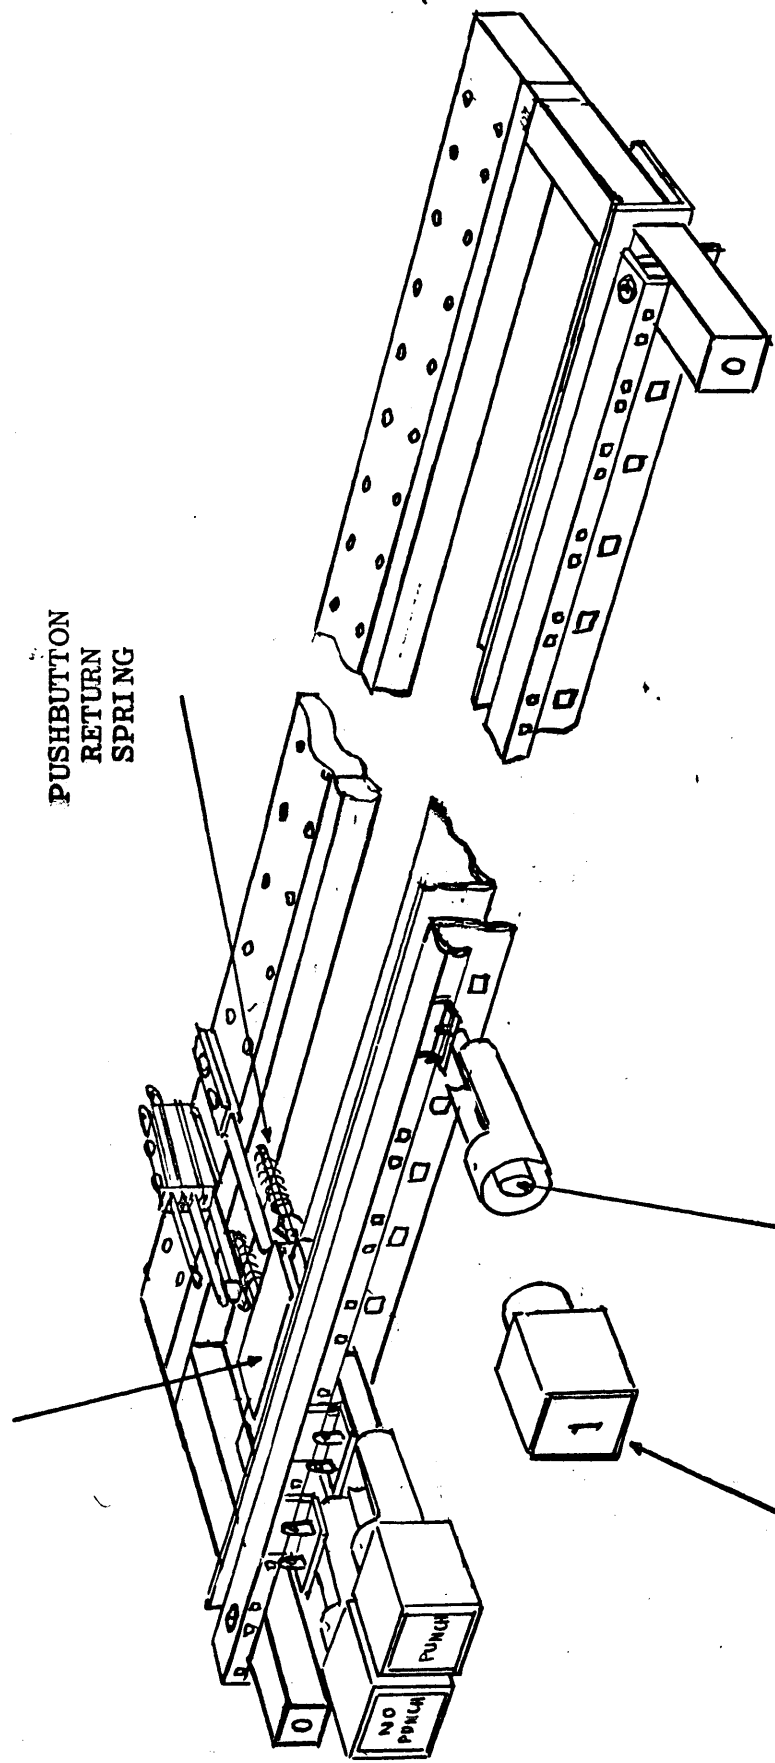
Pushbutton Deck, Assembly Diagram.
